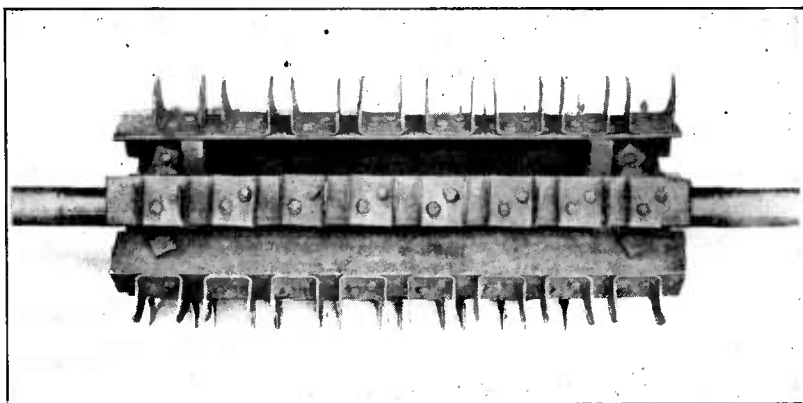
Shredder head showing hooked teeth riveted to angle-iron bars bolted into the head. Six, eight, ten, or twelve bars are used in the shredder head according to the size and make of the husker
